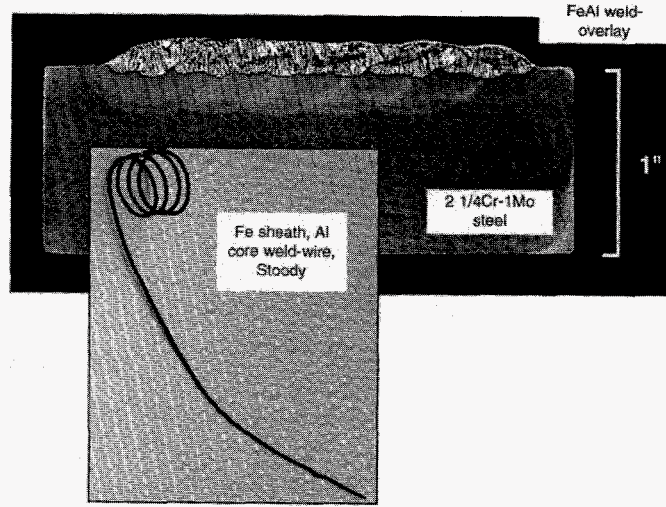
Fe sheath/Al core weld-wire (1.6 mm/0.0625 in) produced by Stoody and formulated to produce weld-overlays with FeAl composition on steel substrates.
